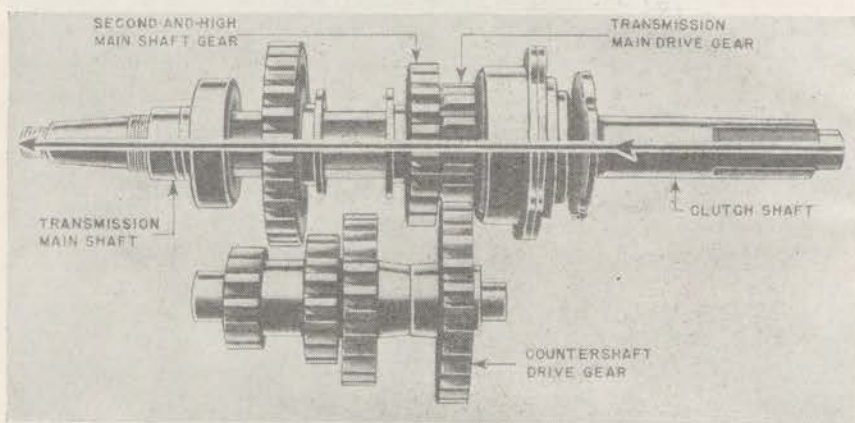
Transmission gears in high-speed or direct-drive position.
